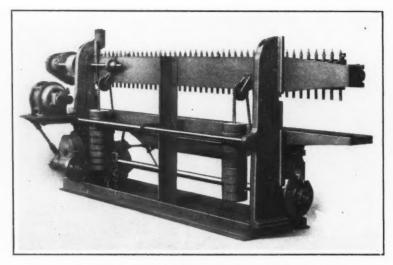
Rear View of Multiple-spindle Drilling Machine, Showing the Steel Construction
